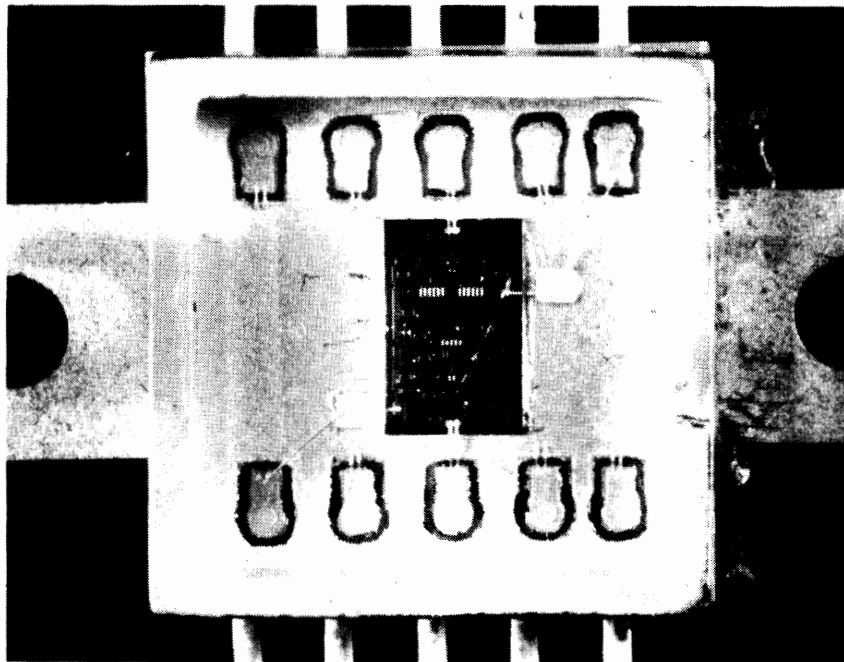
Photo of 5.8 GHz MMIC Assembly in Package
